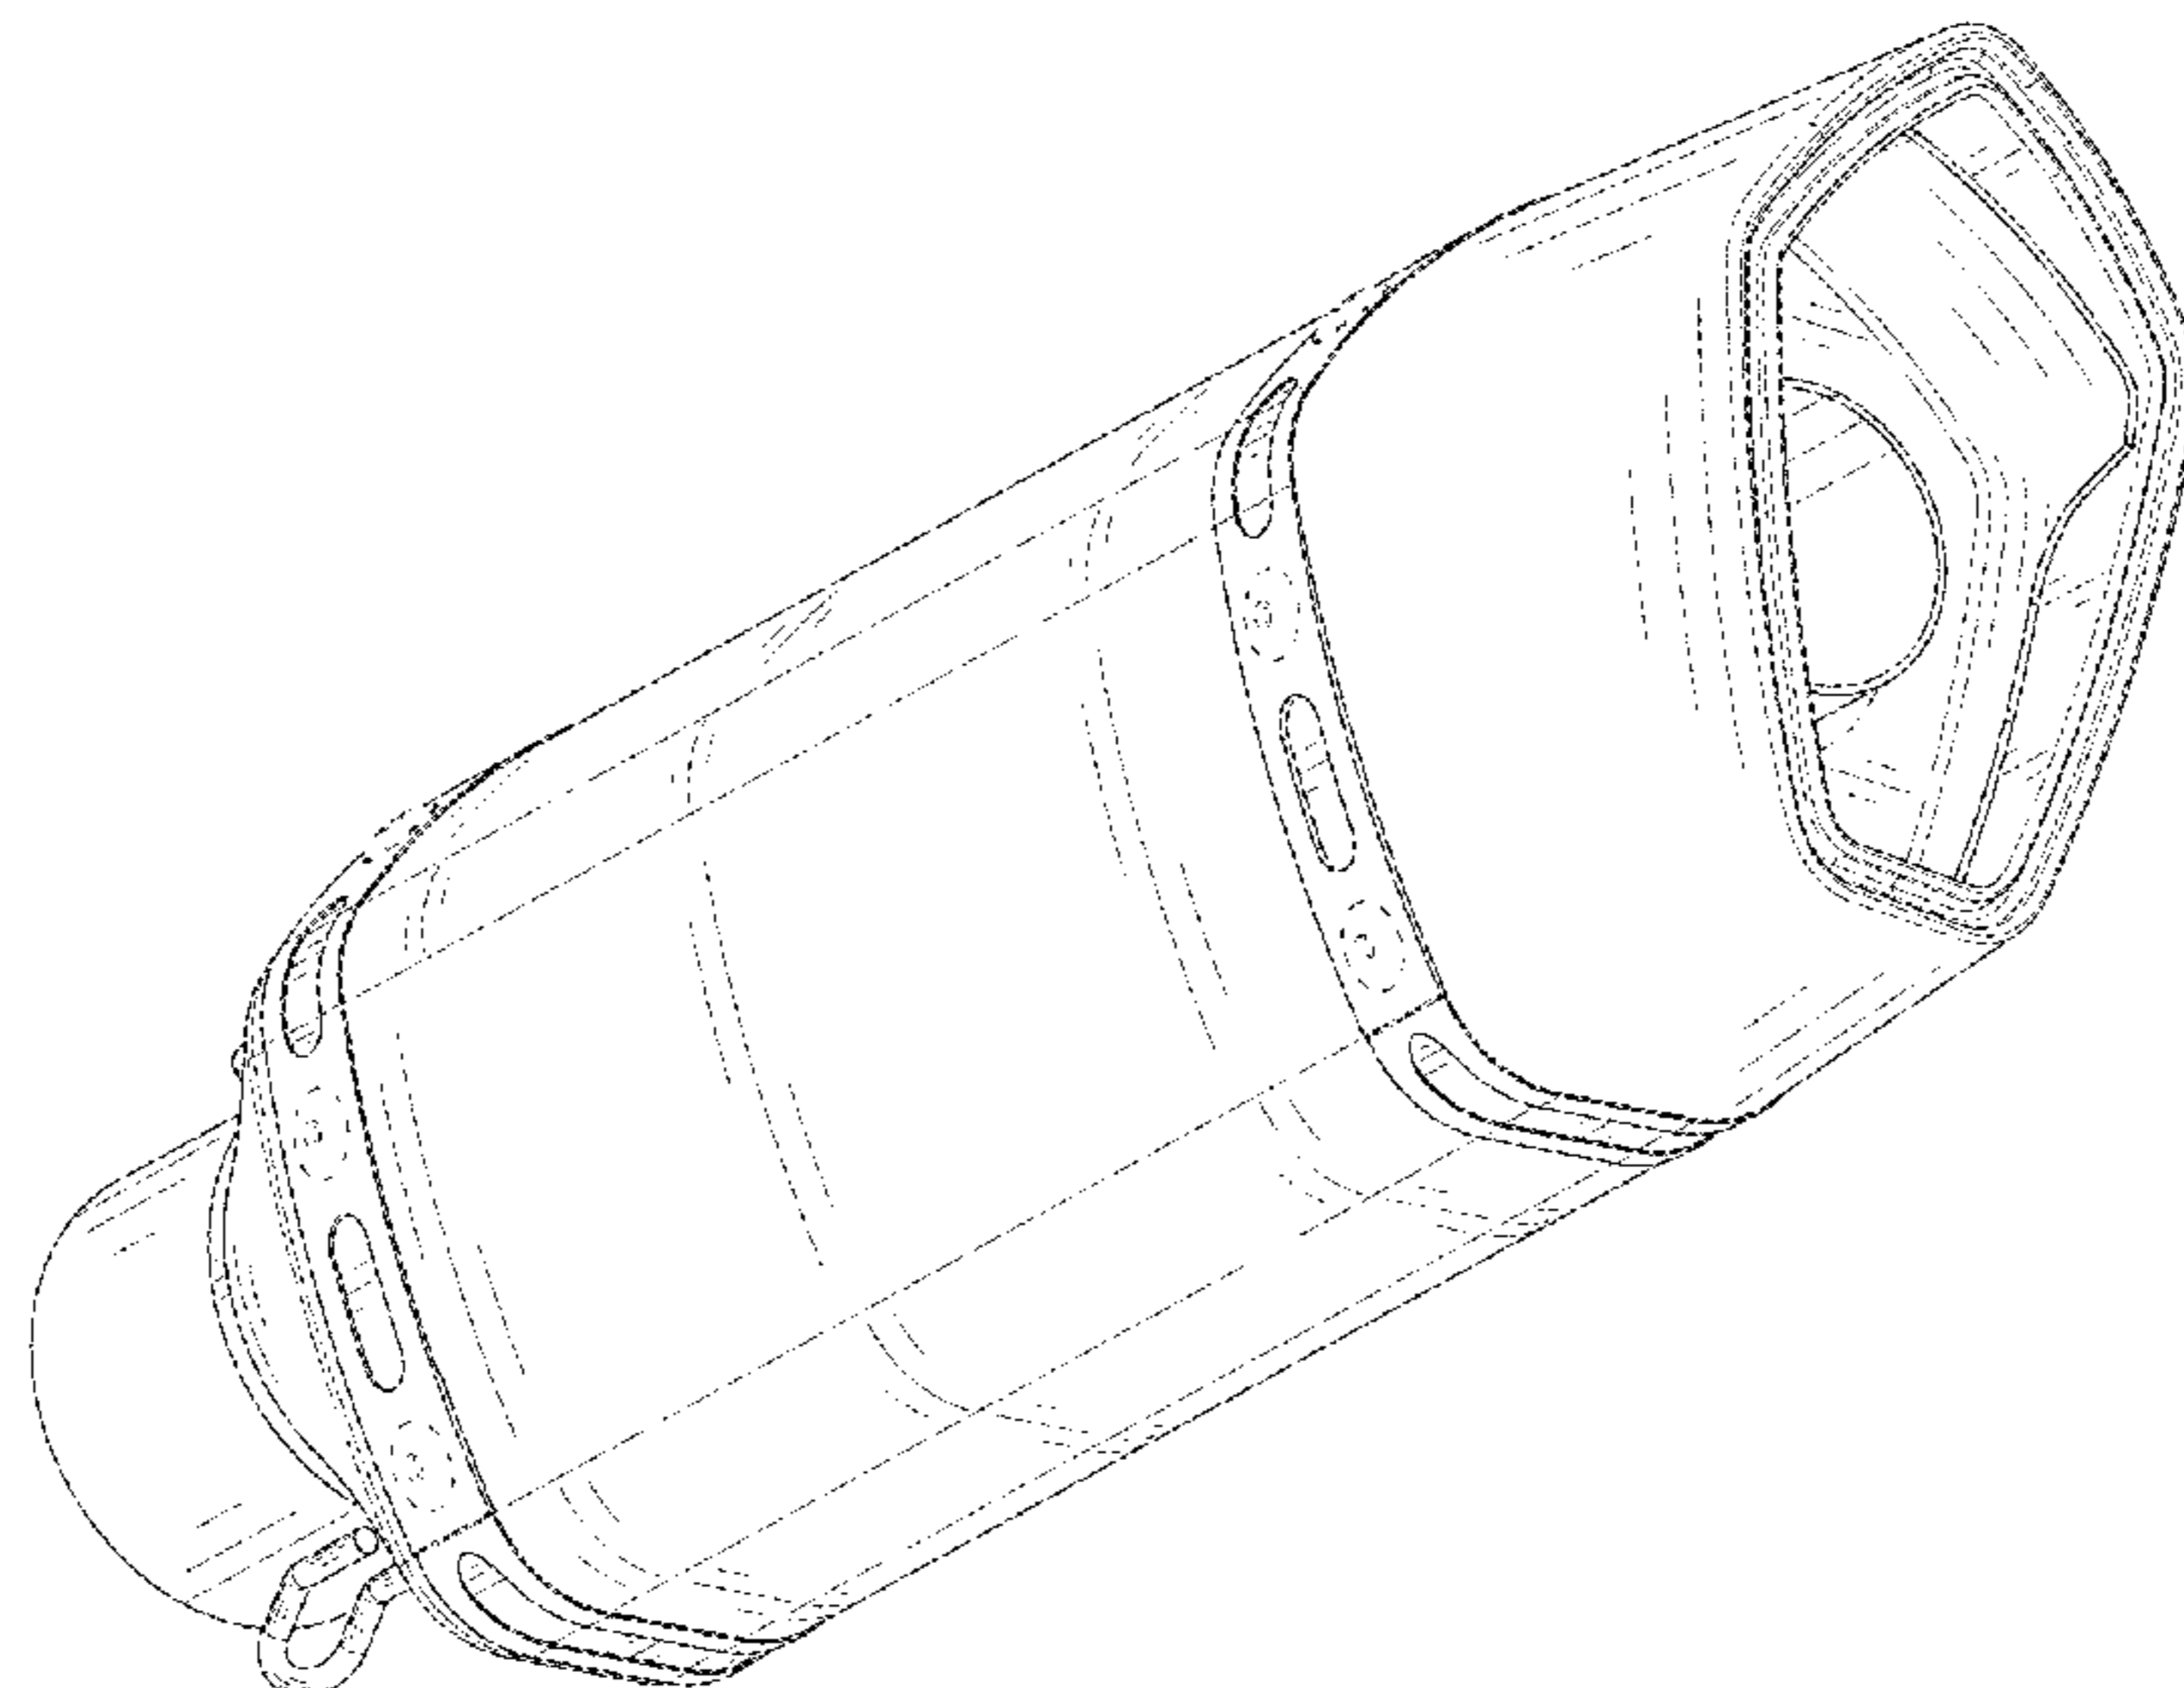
is a front elevational view of a motorcycle muffler showing my new design;
